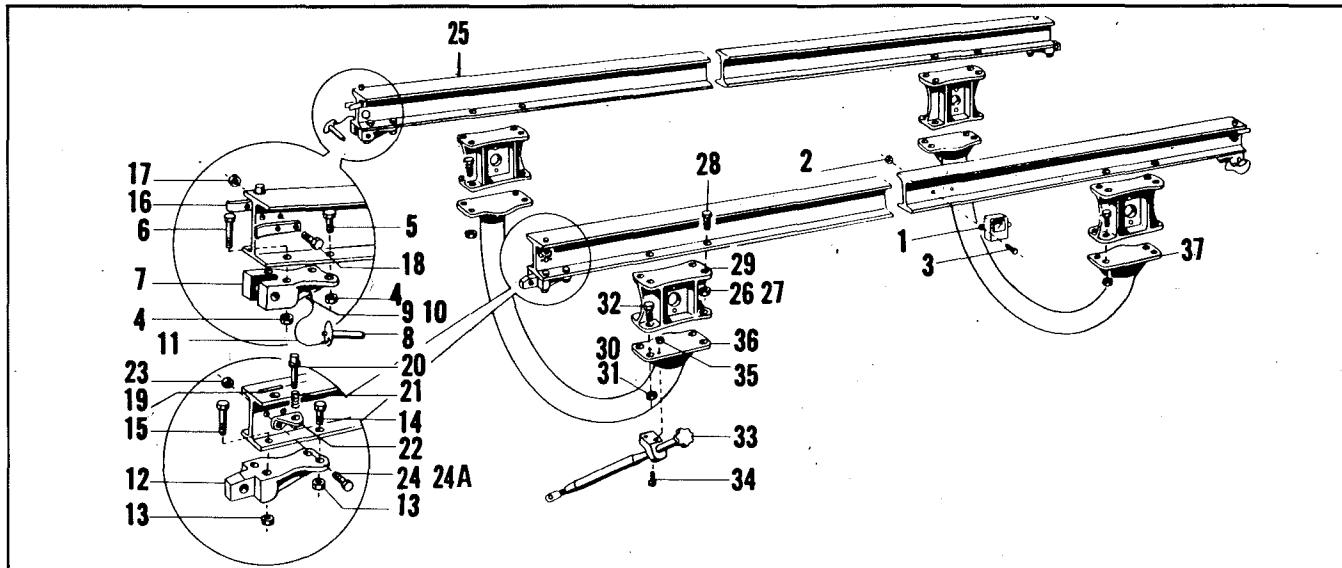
Frame and Transfer Rail Assembly, Part No. 101932 ■
